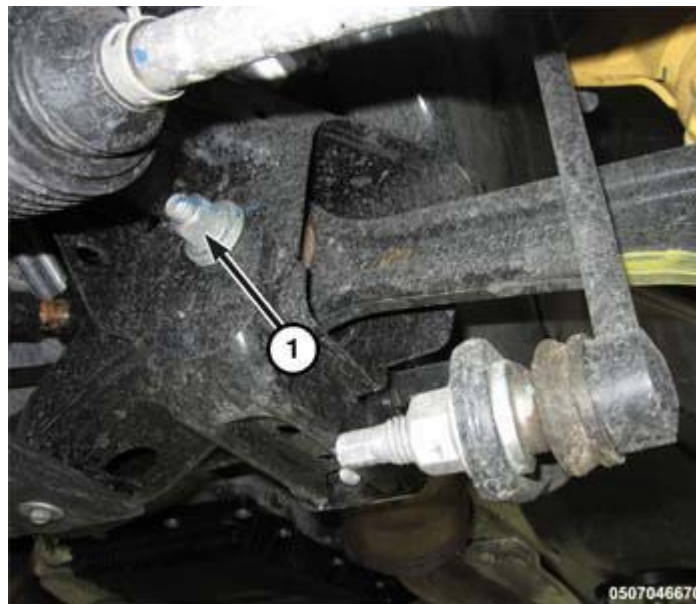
Lower Control Arm To Engine Cradle Bolt And Nut
